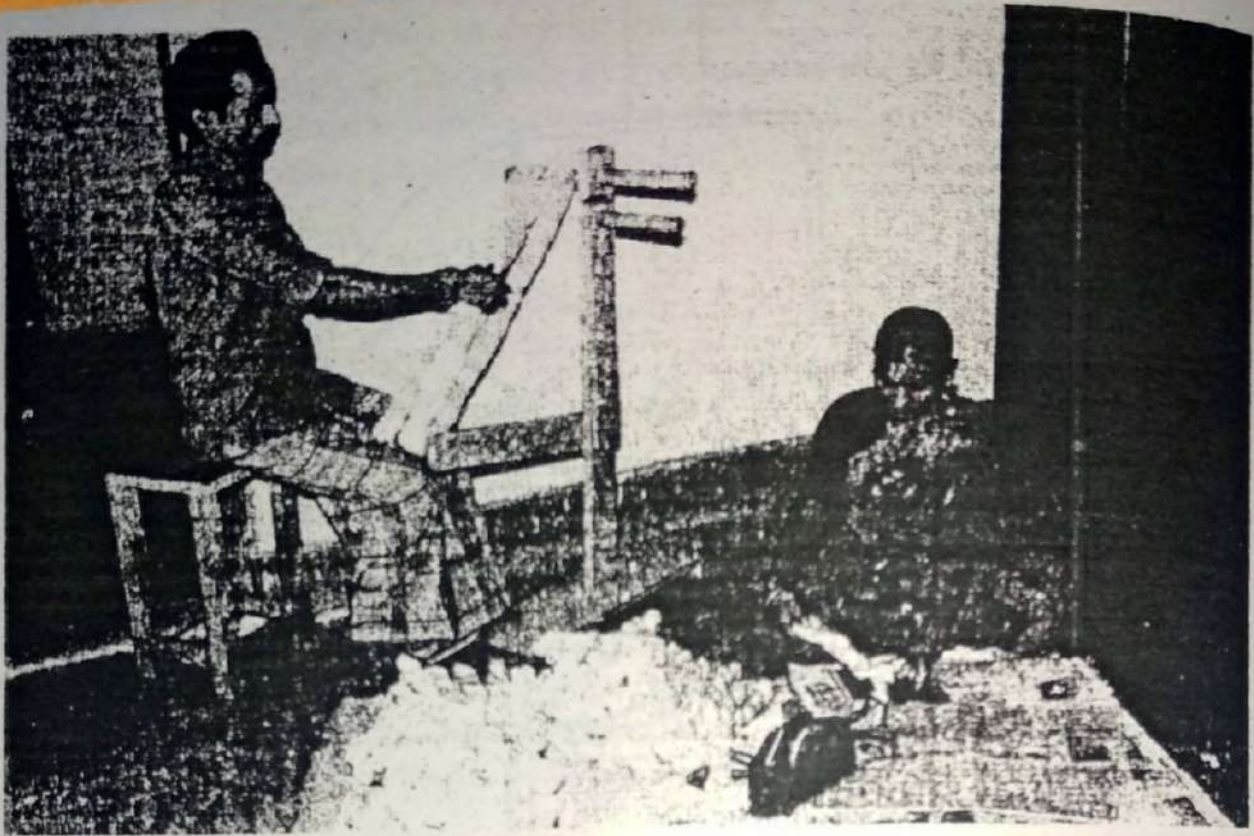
Hank Inspection, cleaning and skien forming in India
